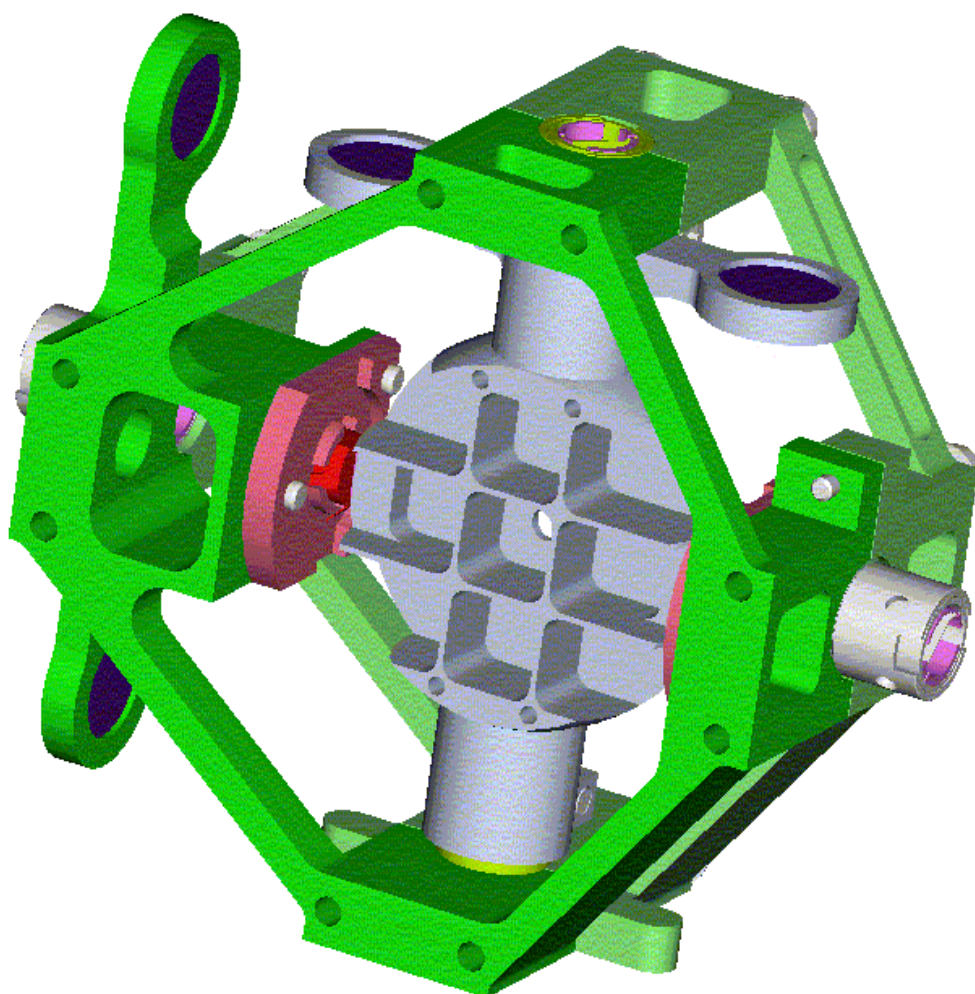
View on underside of mirror - Chop stage grey, jiggle stage green, motor magnets purple and sensor mounts (shown without adhesive) red.
